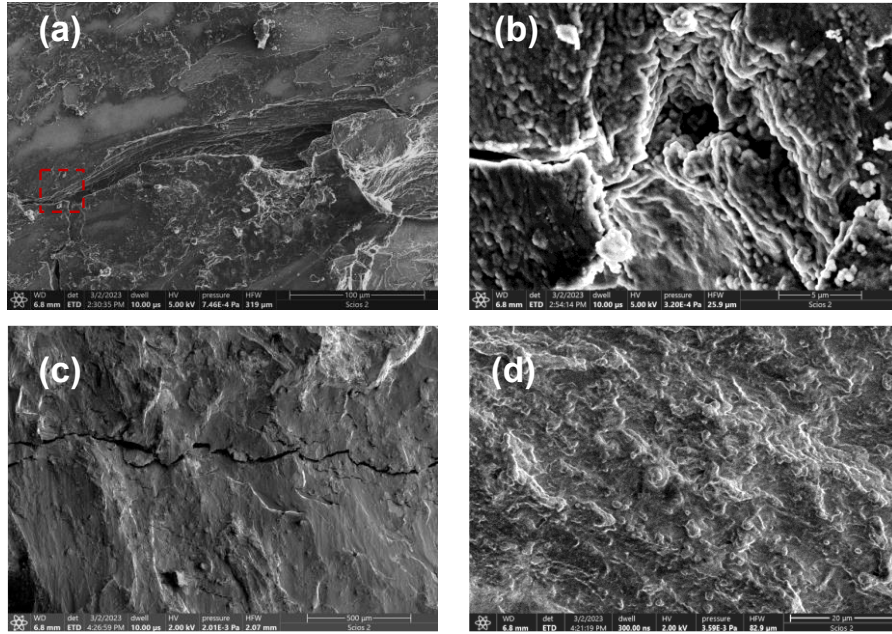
FSW joint failed on weld zone after lap shear: (a) 6022 Al RS; (b) ZEK100 Mg RS. FSW joint failed on weld zone after fatigue: (a) 6022 Al RS; (b) ZEK100 Mg RS.
